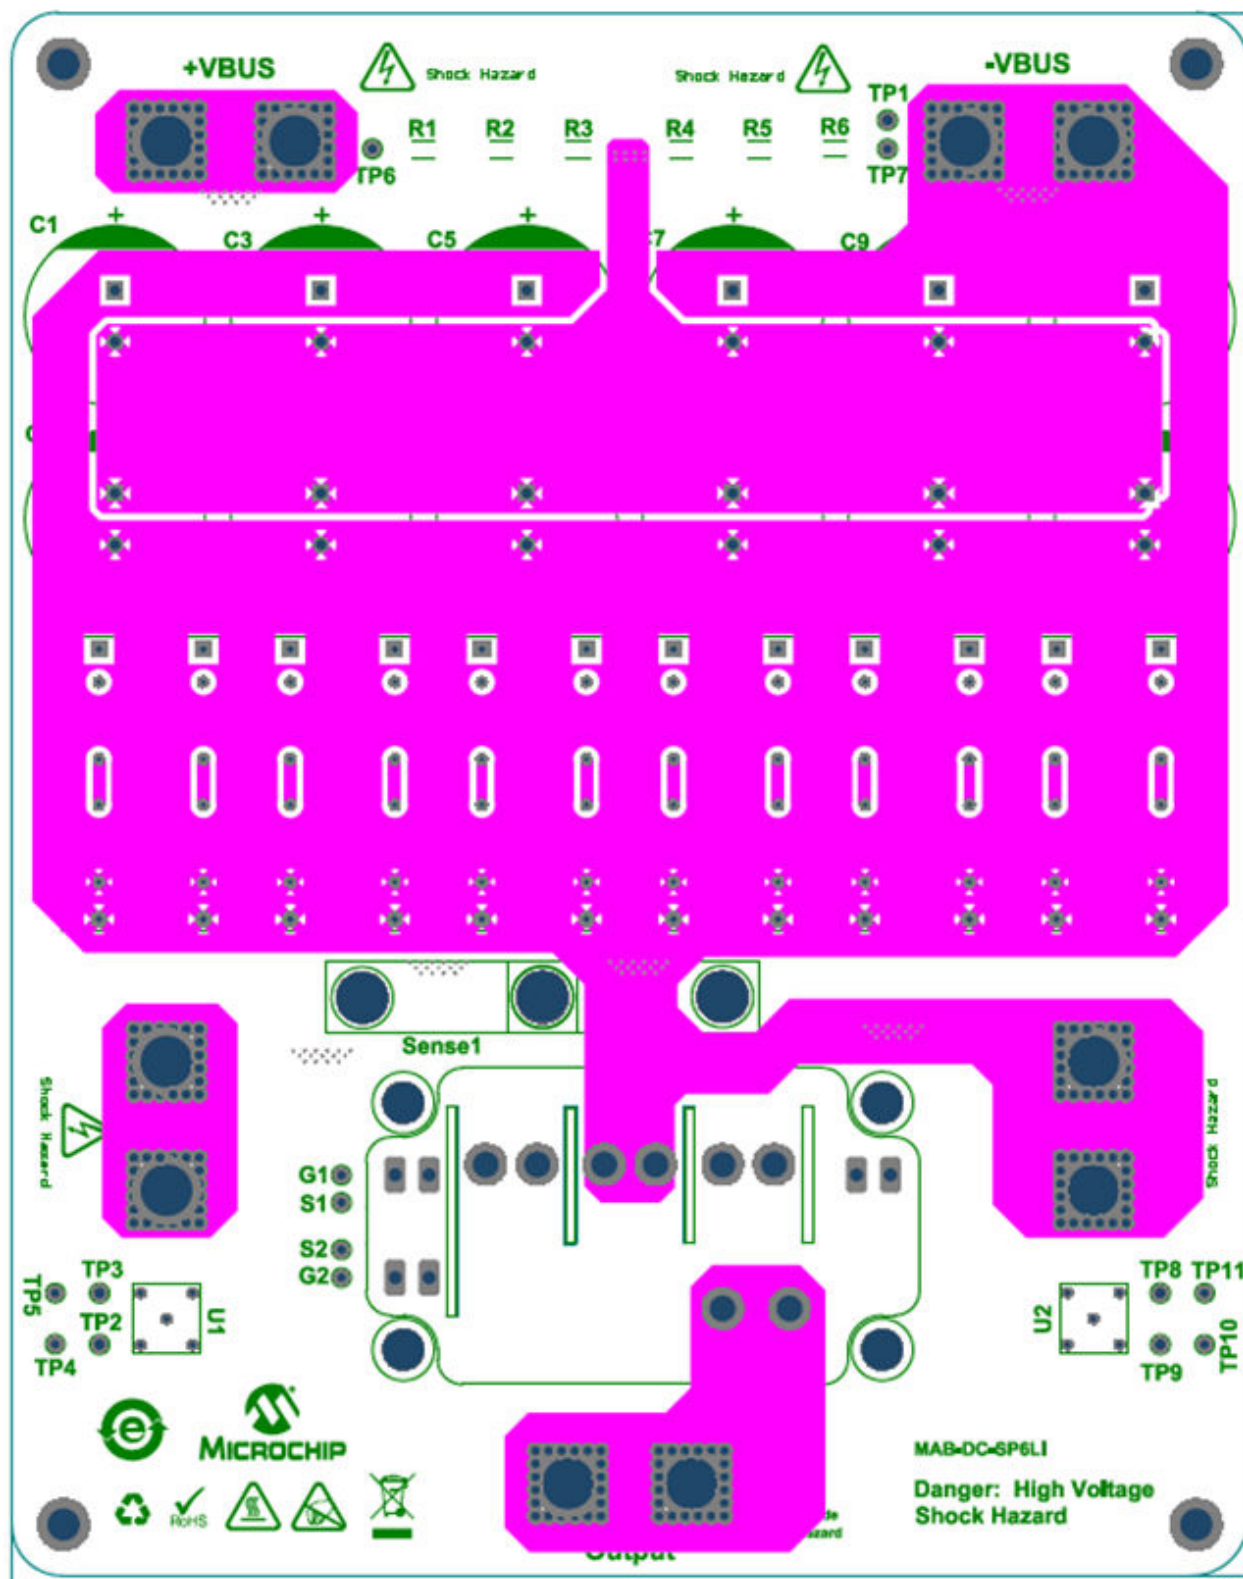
SP6LI Evaluation Board Bottom Layer
